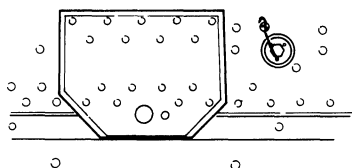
Engine Access Door Closing (Sheet 4 of 5)
